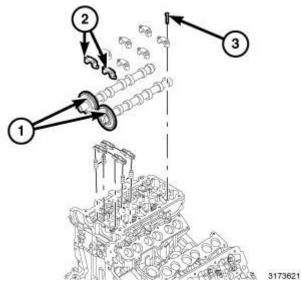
Right Side Intake & Exhaust Camshaft, Camshaft Bearing Caps & Bolts Courtesy of CHRYSLER GROUP, LLC
